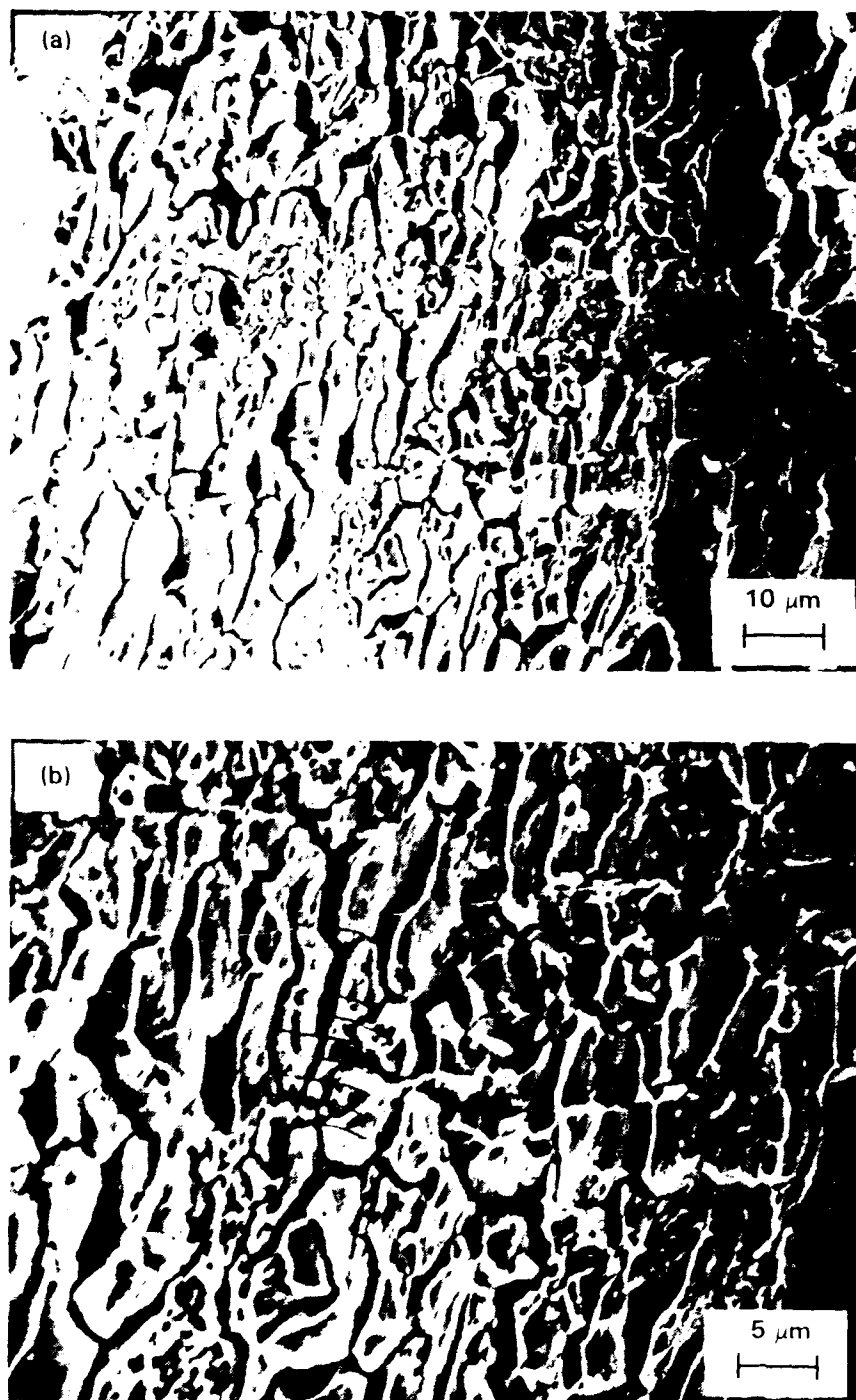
FRACTOGRAPHS OF THE LONGITUDINAL TENSILE SAMPLE SHOWING:
